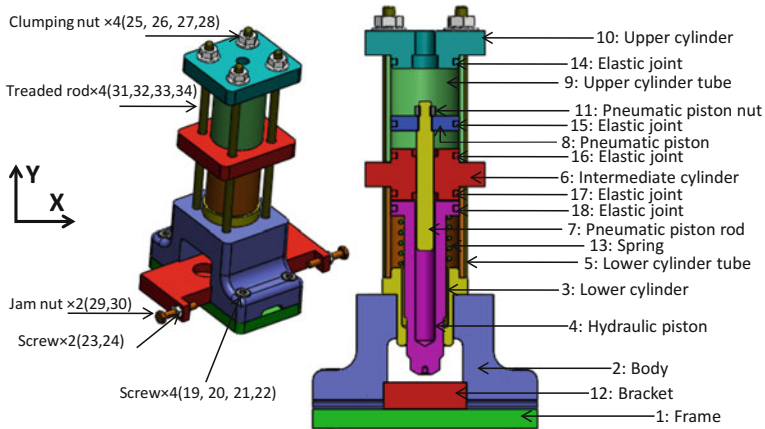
CAD model of the pneumatic crimping tool and nomenclature of each part
